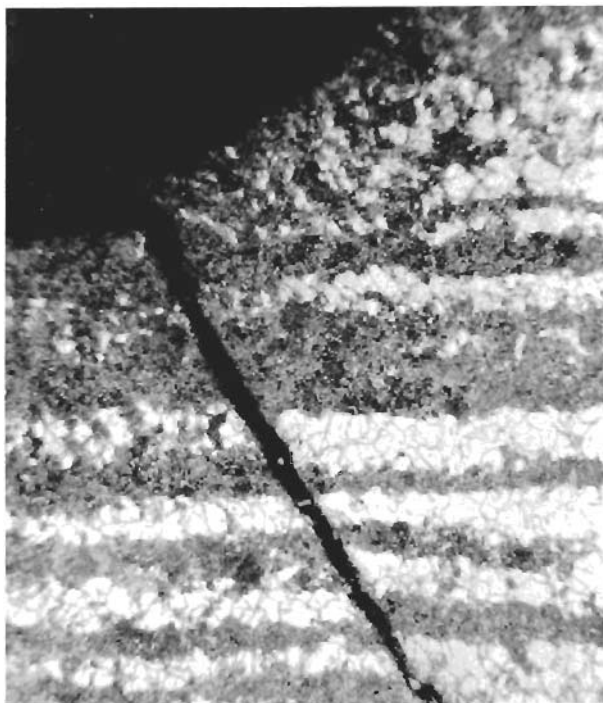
Shoulder radius next to a bearing diameter. Carburized case had been removed by grinding, allowing a fatigue failure in bending due to low strength of surface material.
